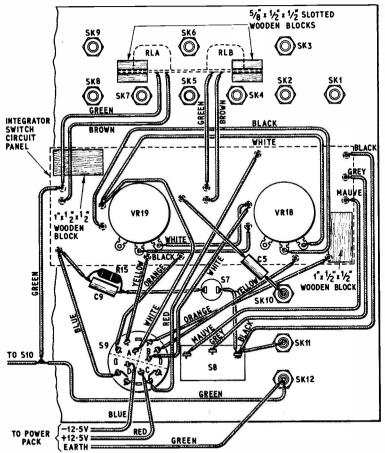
Rear view of UNIT "B" front panel showing integrator switch wiring
